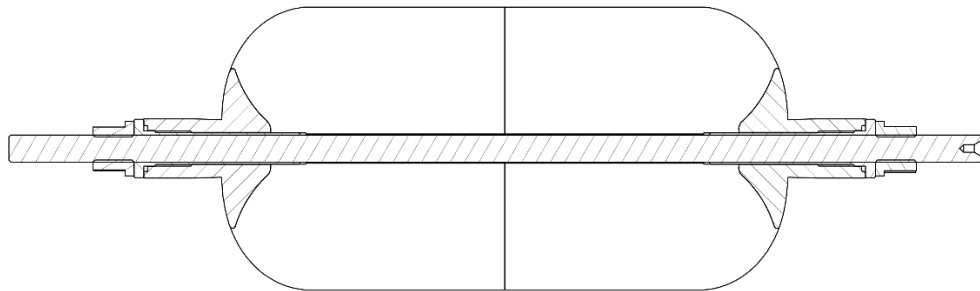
Scheme of the two blocks assembly in one mandrel.
